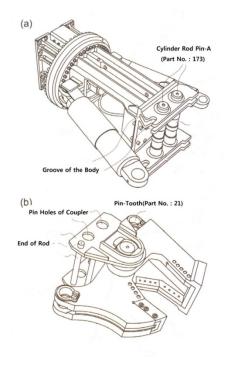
Note Locations of Rod, Groove in Body, Pin Holes of Coupler and Cylinder Rod Pin "A"
